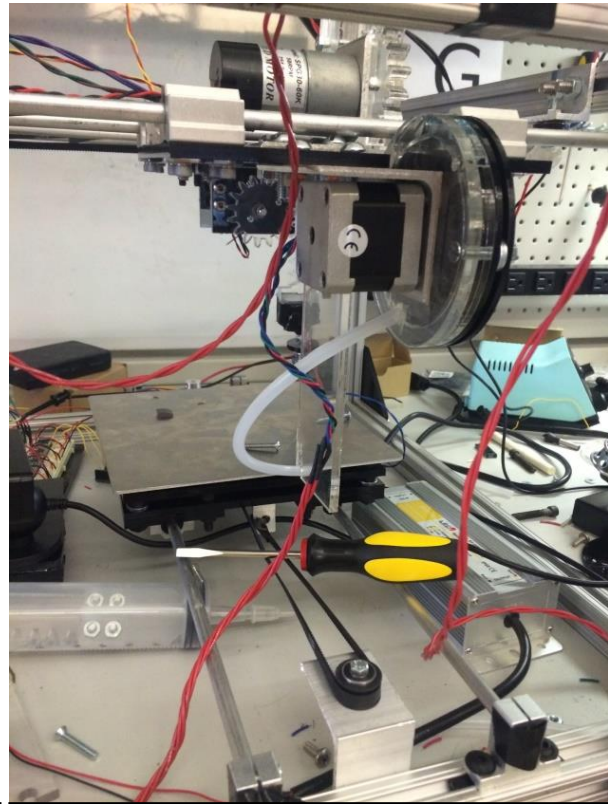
Back view of revolver mechanism actuated via stepper motor with tube leading down to top of part.
